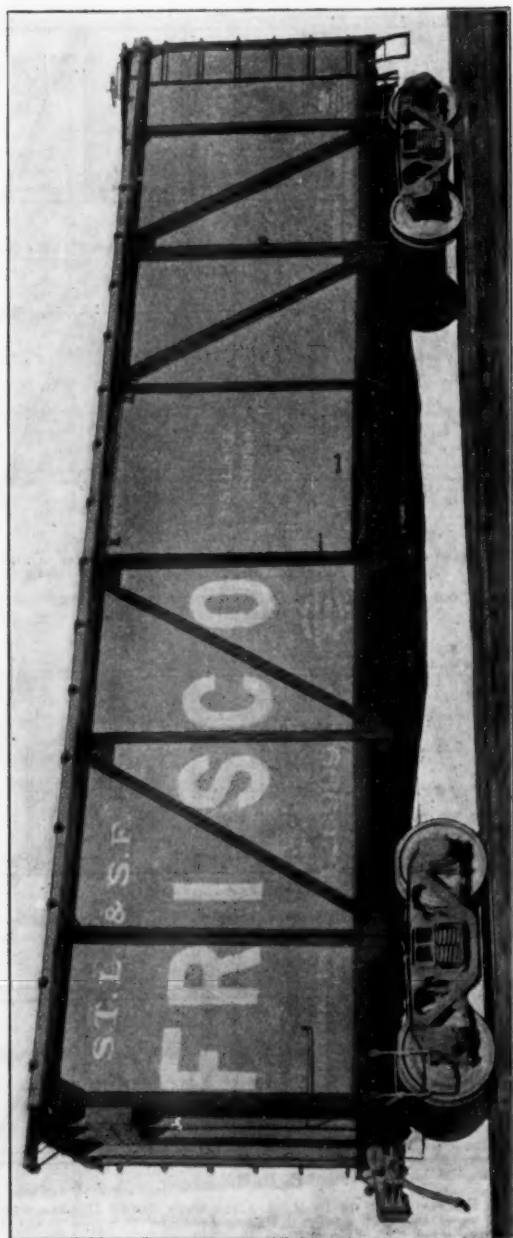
40-TON OUTSIDE STEEL FRAME BOX CAR USED ON FRISCO SYSTEM
